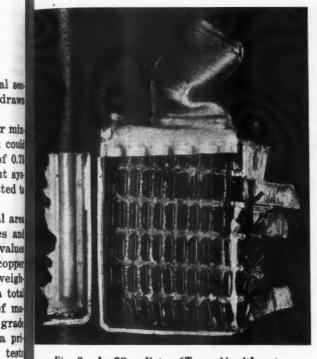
Ju 88 radiator (Type A) with outer shell removed.
